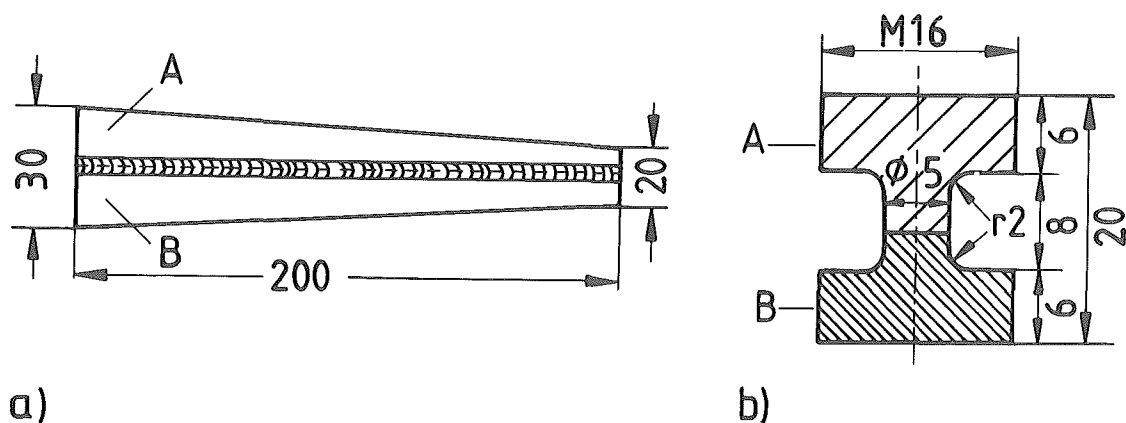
a) Geometry of the welded sample for the laboratory rolling experiment; b) Geometry of the sample for the microtensile experiment: I, II are the construction steel and the tool steel, respectively. (Dimensions are given in millimeters.)
